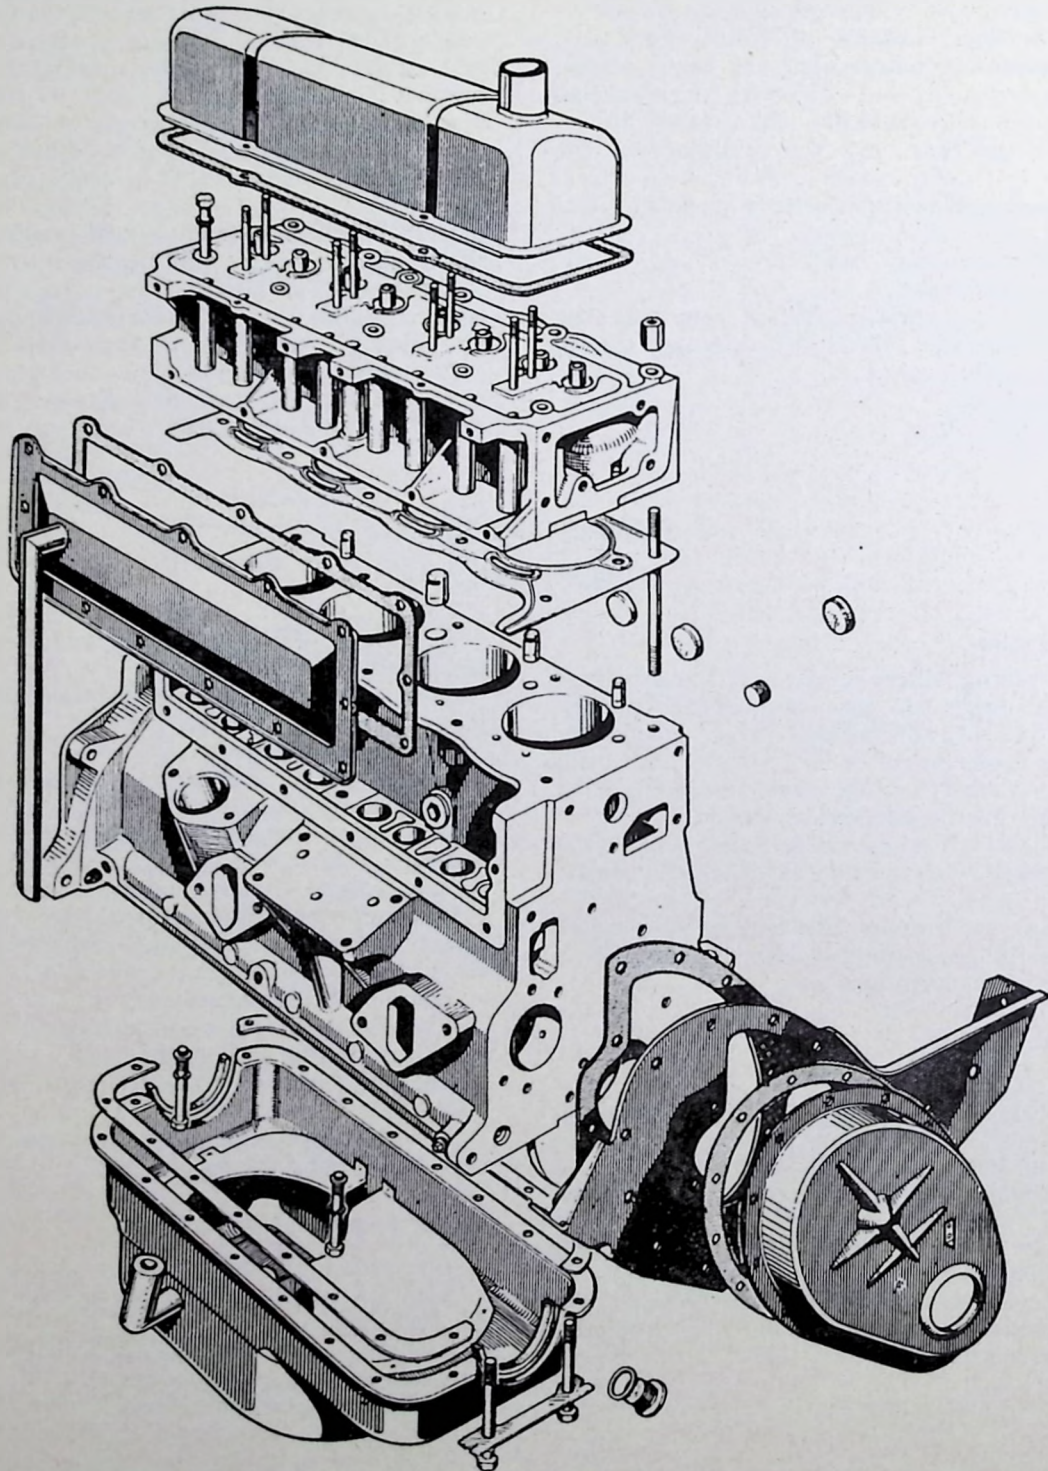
Cylinder block and associated parts (O.H.V. engine).
